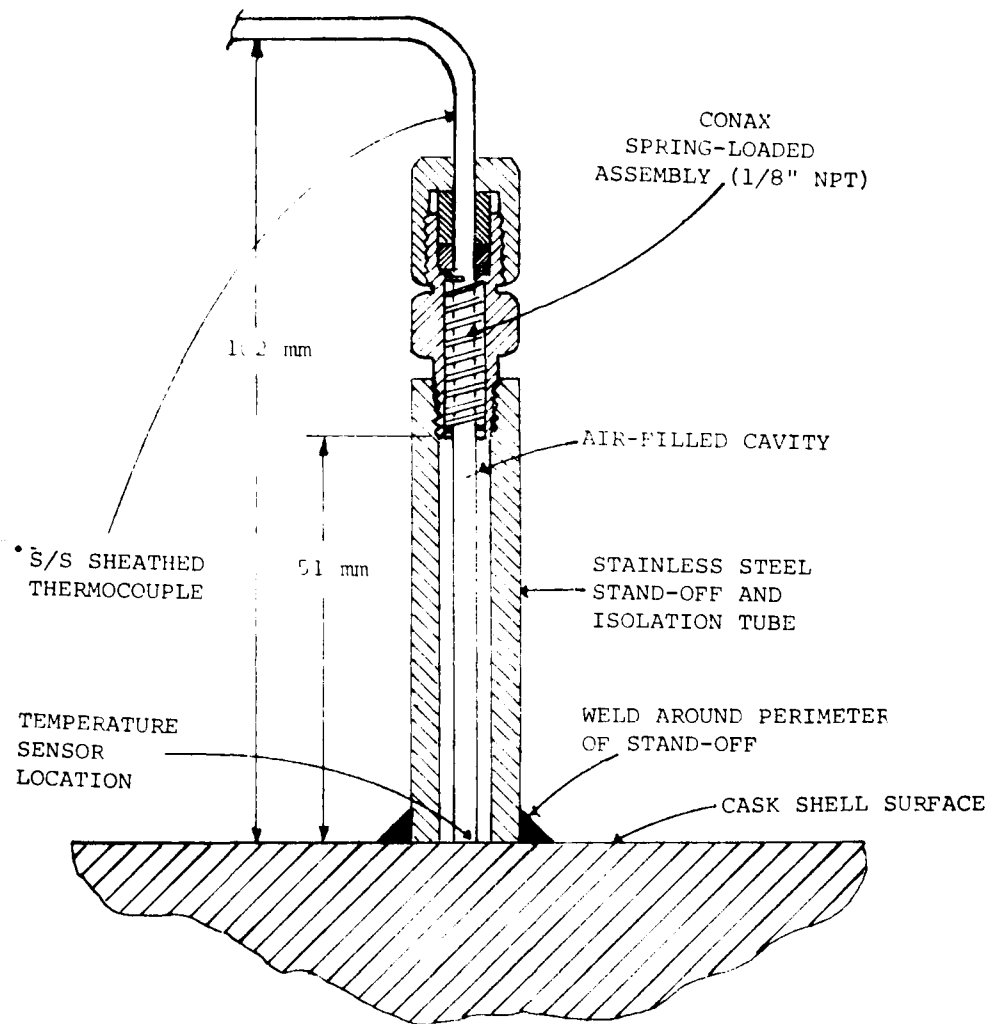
The Thermocouple (TC) Attachment Technique for the Inner Shell Surface (ISS)
